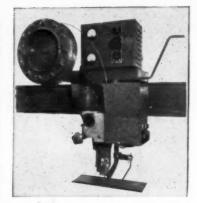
New carriage type "Lincolnweld" mounted on beam.
